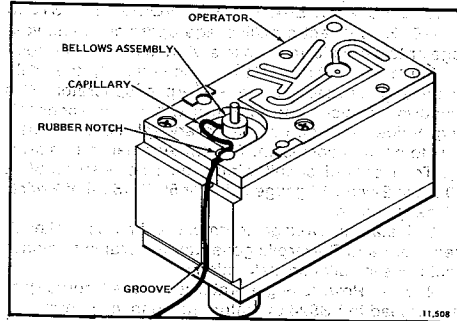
Form capillary smoothly and without crimping to fit in hole in operator.
